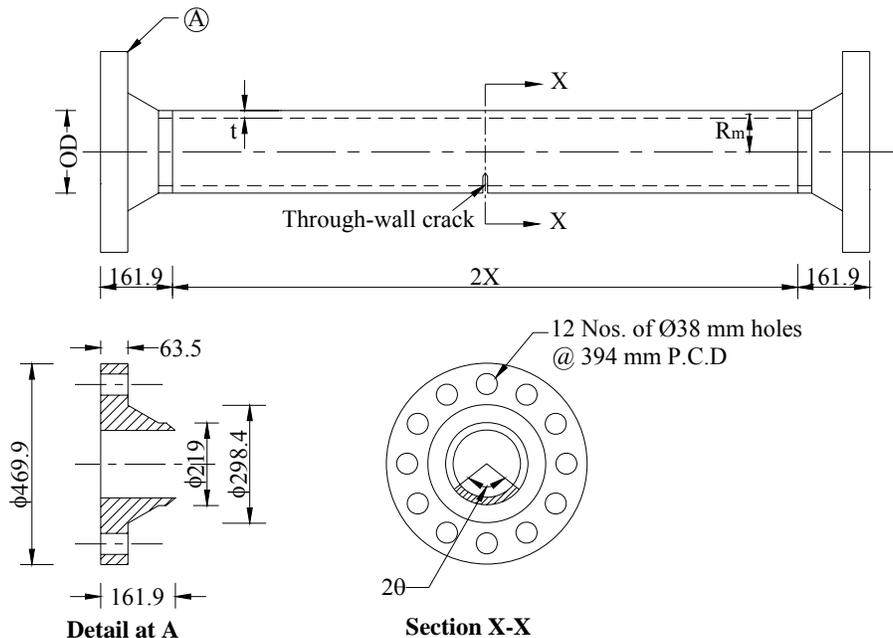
Details of pipe assembly with pipe having a through-wall crack at the centre. All dimensions are in mm.
